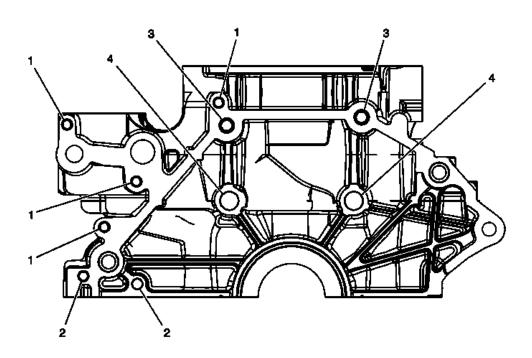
Engine Block Thread Repair Specifications -- Front View Courtesy of GENERAL MOTORS COMPANY
